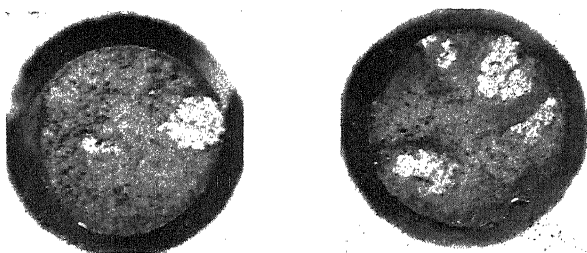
FRACTURES TEST-BAR 948B. SAME FORGING AS FIG. 23 AFTER TWO QUENCHES AND A DRAW. $\times 2$.
